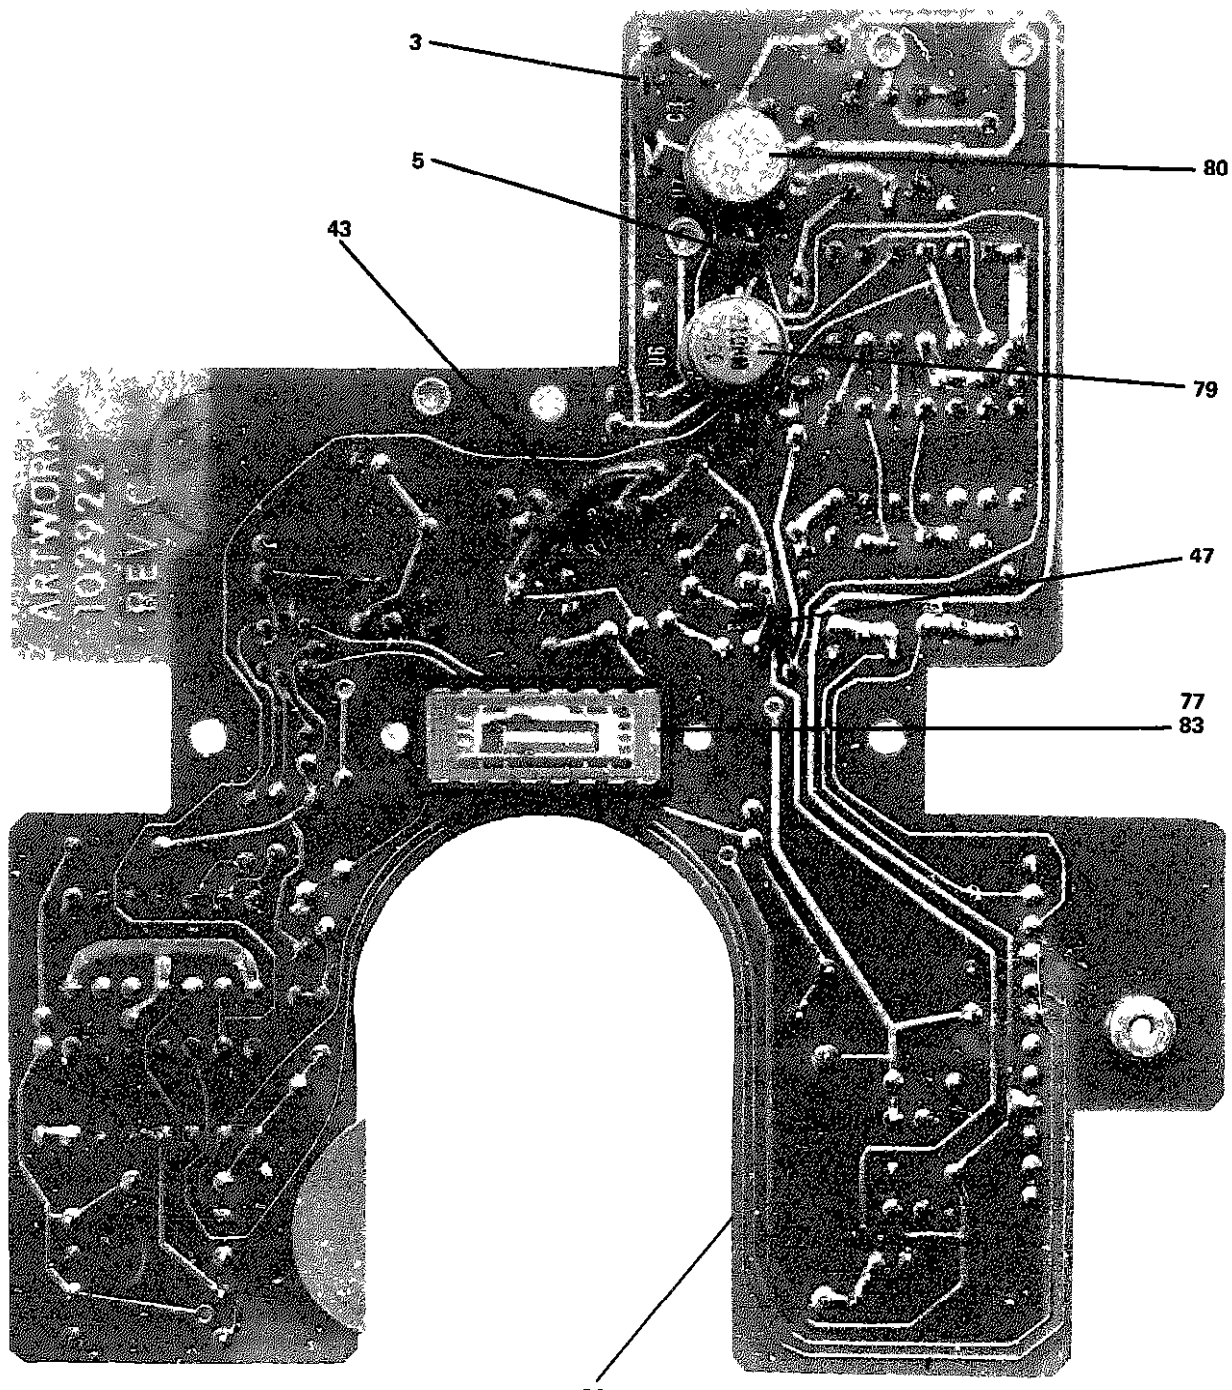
Read Head Analog Circuit Card Assembly 1A7A2A2A1 (Sheet 3 of 3)
